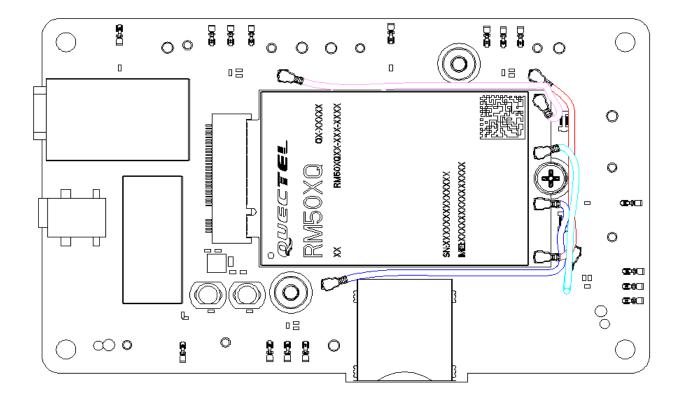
RM500Q-AE/RM502Q-AE RF Cable Assembly
